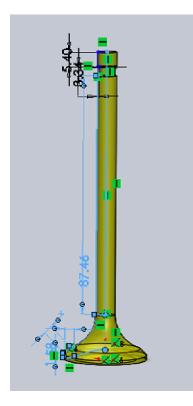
SolidWorks drawing of intake valve (all dimension in mm)
